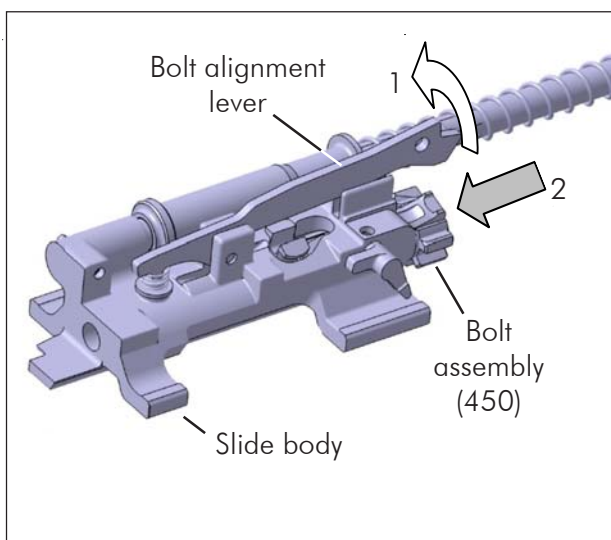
f - Raising the bolt alignment lever and pushing the bolt assembly (450)
